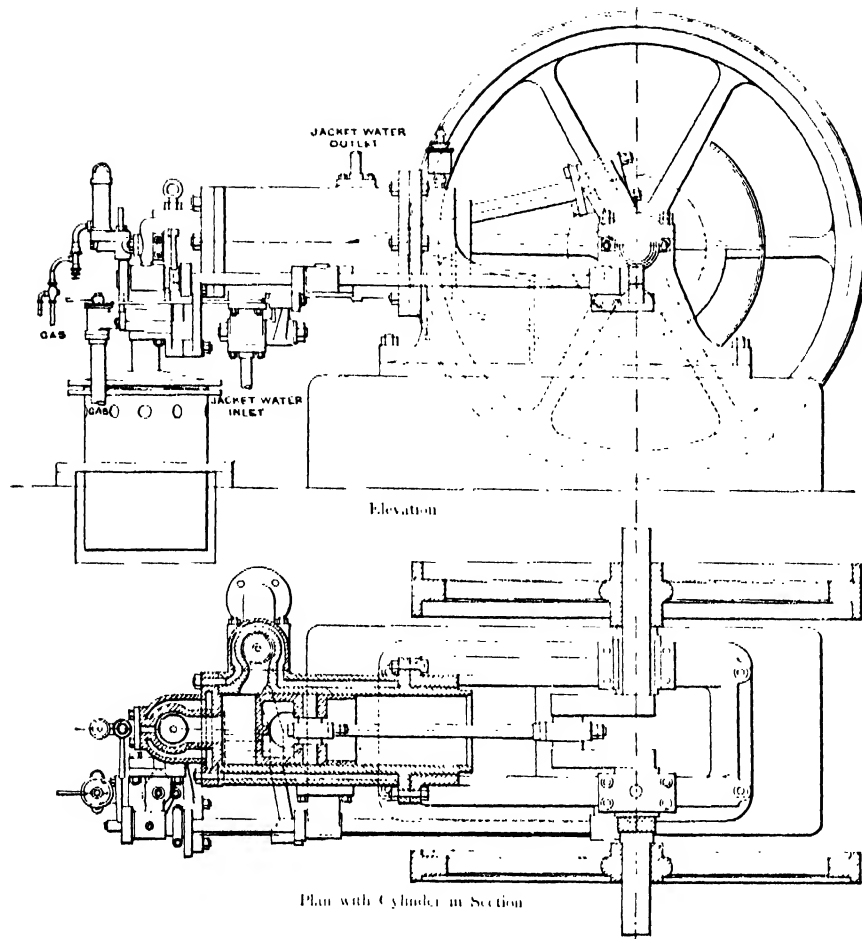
Niel Engine showing Conical-Valve Arrangement
